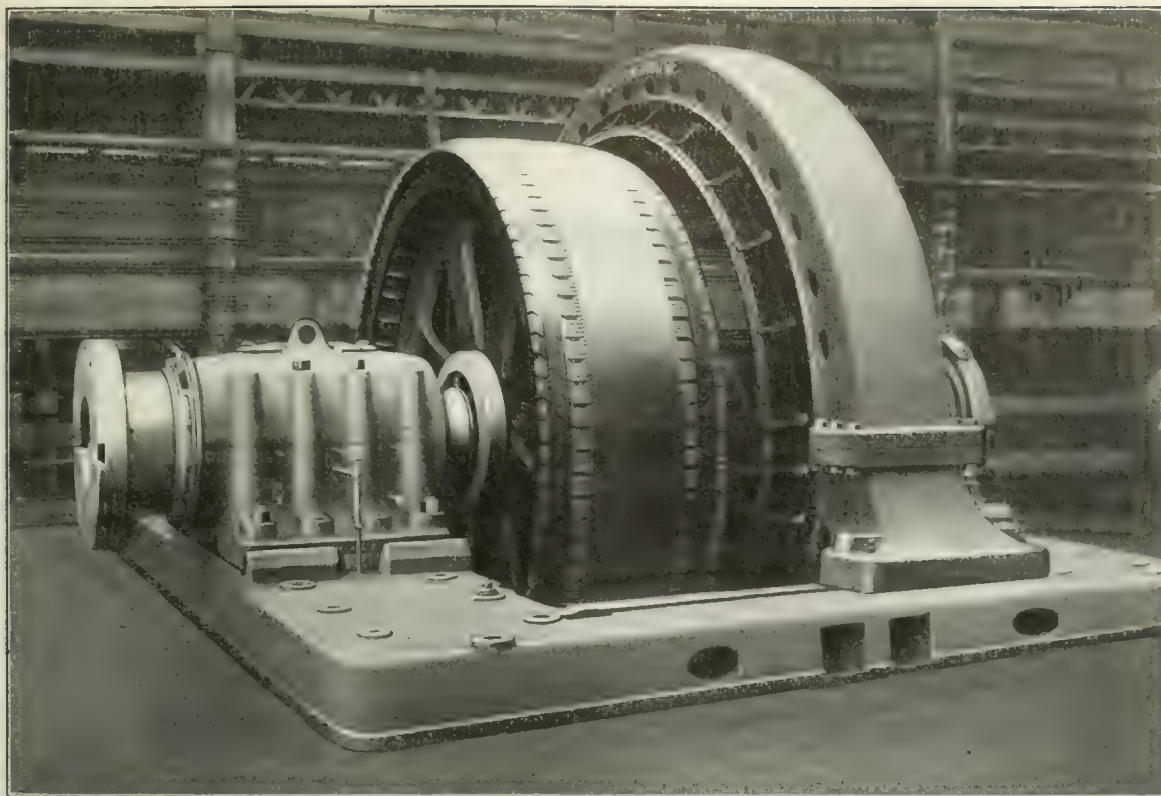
3200-Hp. Roll Motor with Stator Moved Aside to Allow Inspection of Rotor.
